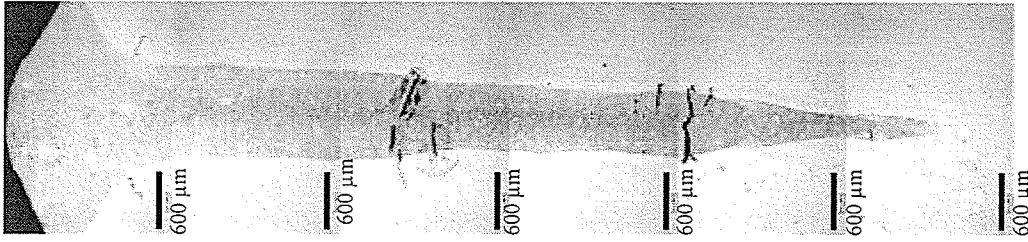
Weld cross-section of Waspaloy showing a typical nail head EB weld profile
